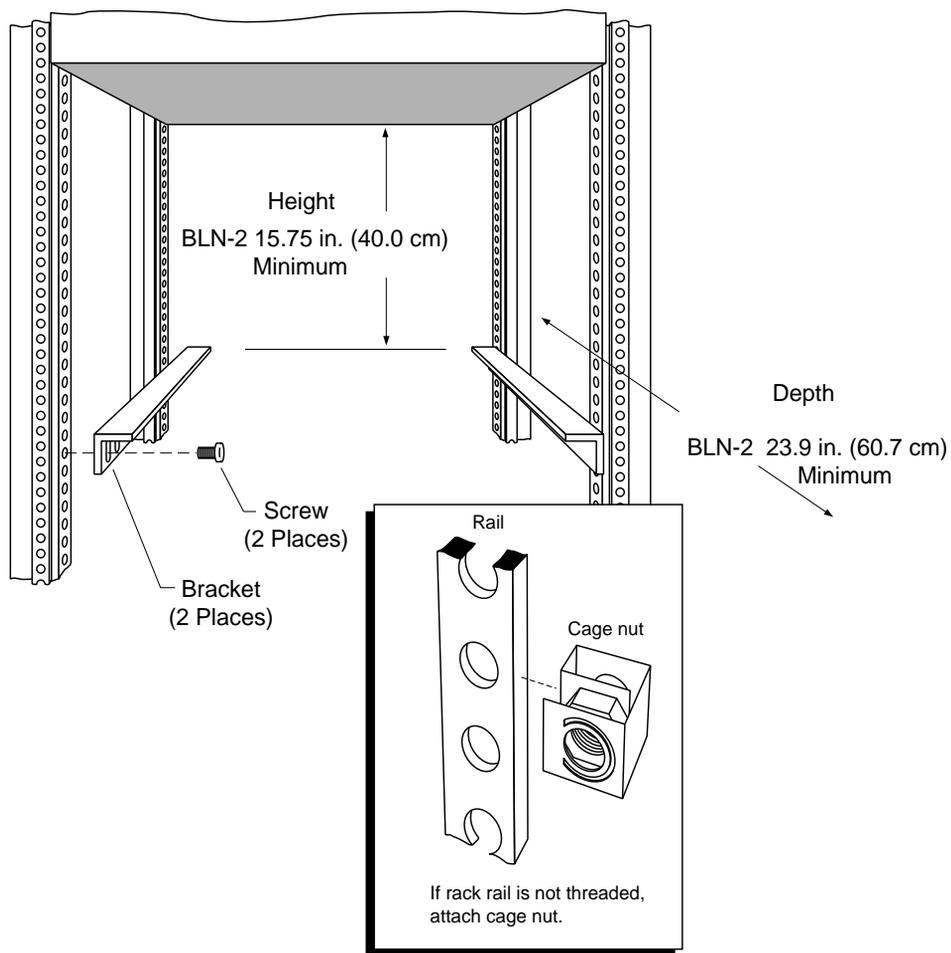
Attaching Angle Brackets to Support the BLN-2
